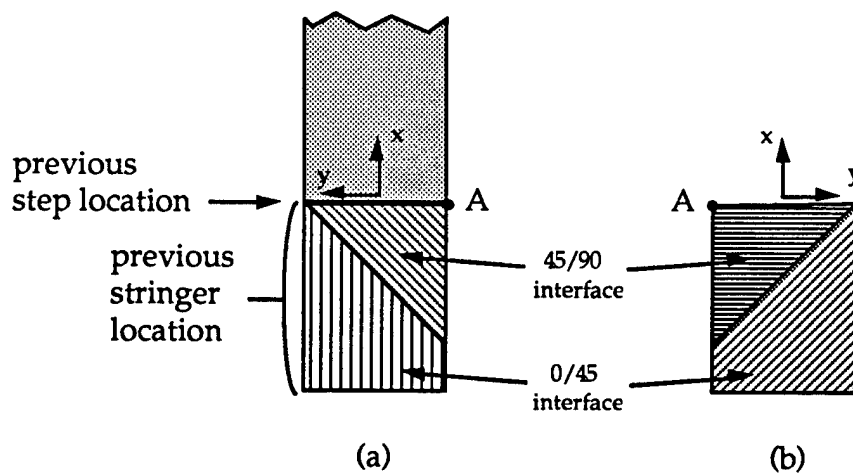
Fracture surface of case 1 and 4 specimens. (a) Plate side of the fracture surface. (b) Stringer side of the fracture surface.
